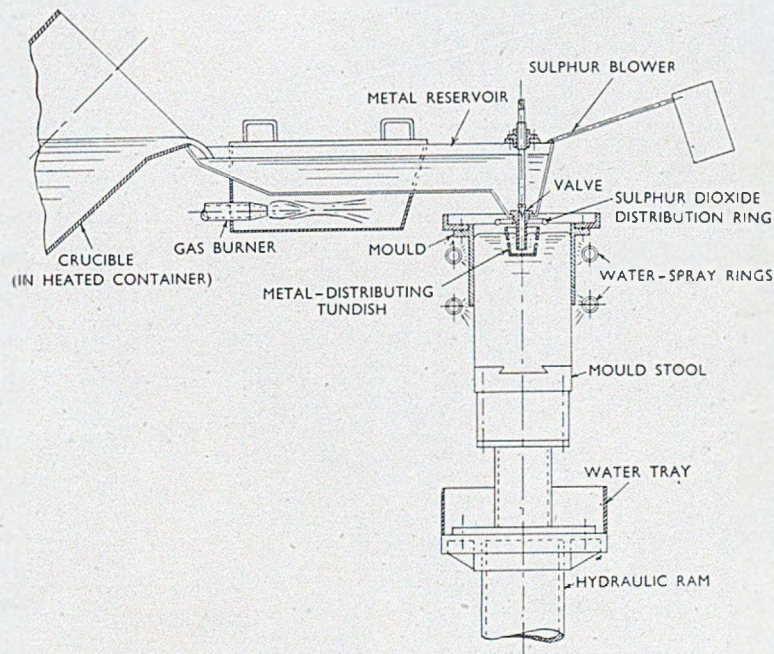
The Essential Components of the D.C. Casting Machine.
